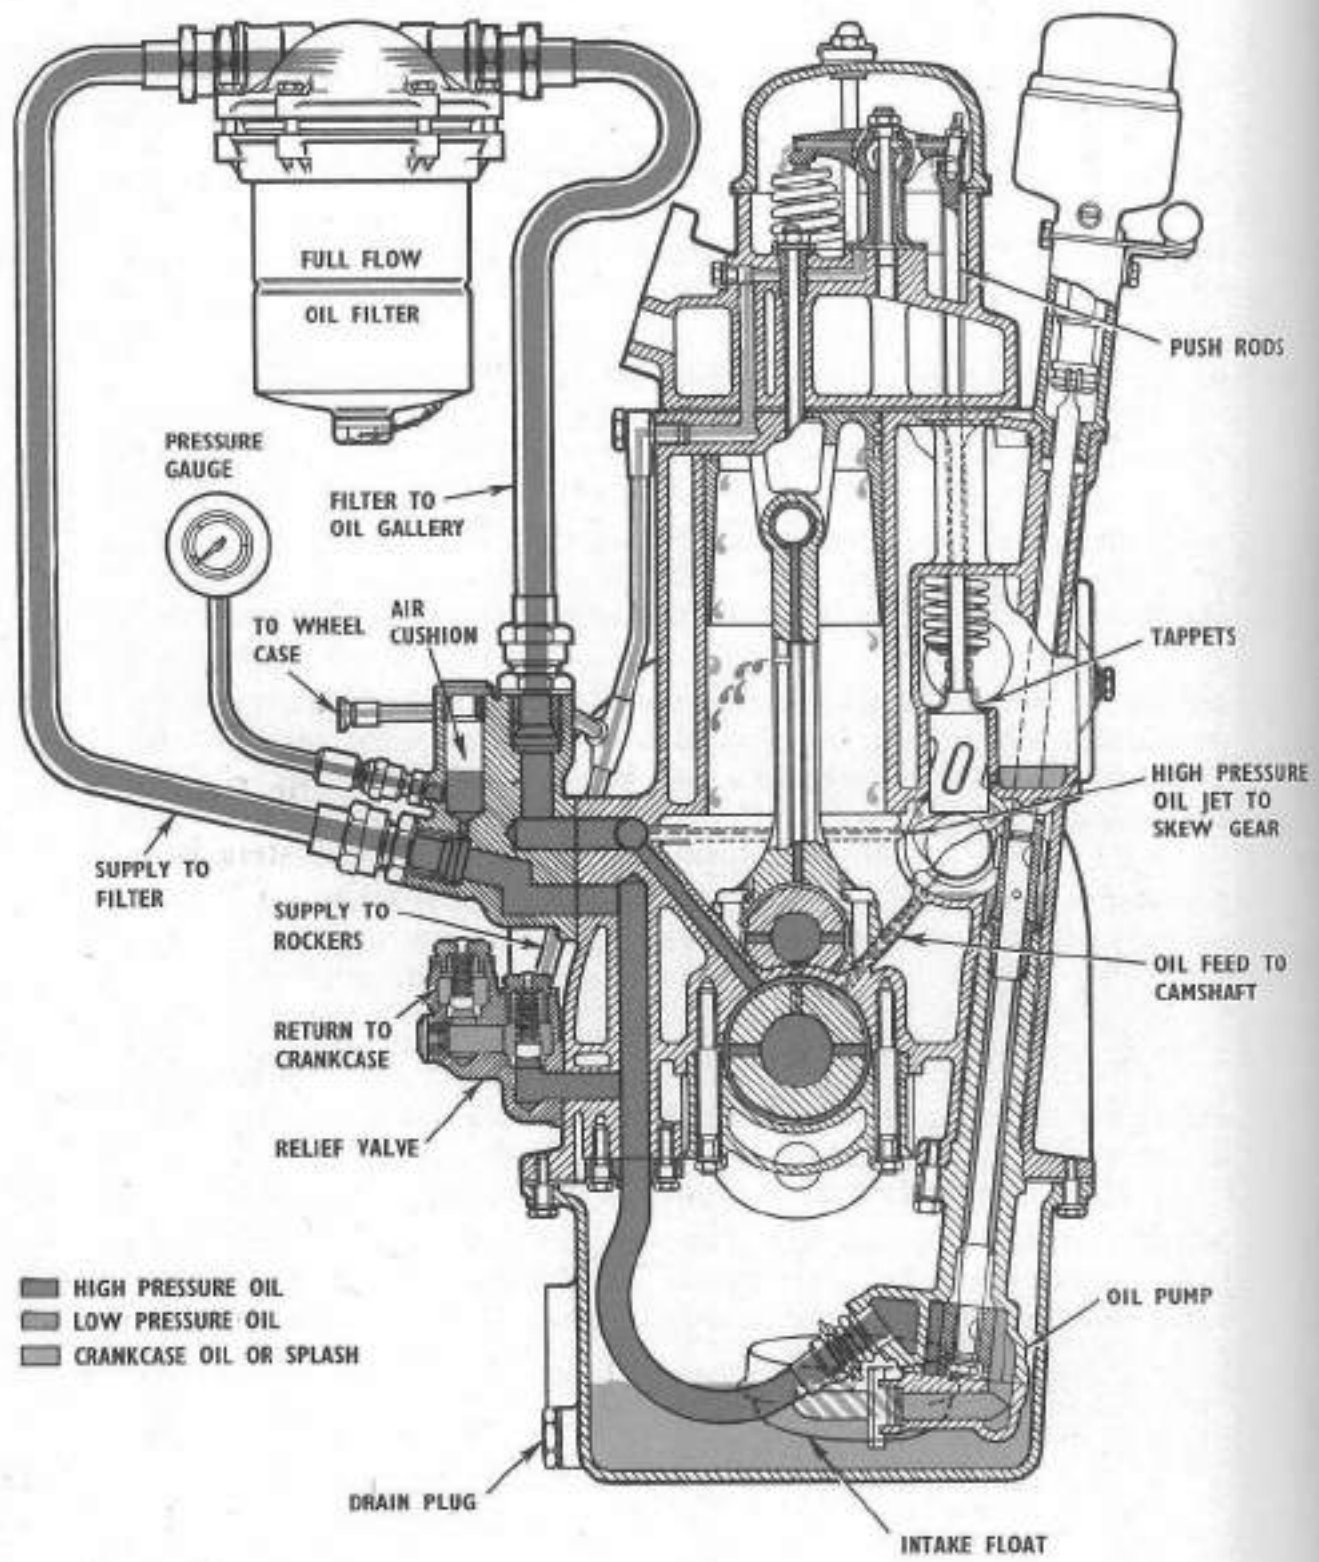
ENGINE LUBRICATION SYSTEM.
